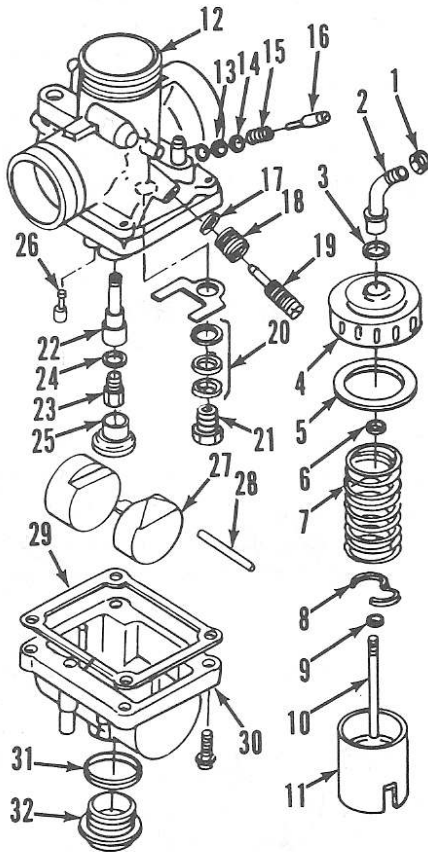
Typical exploded view of VM type Mikuni carburetor.
